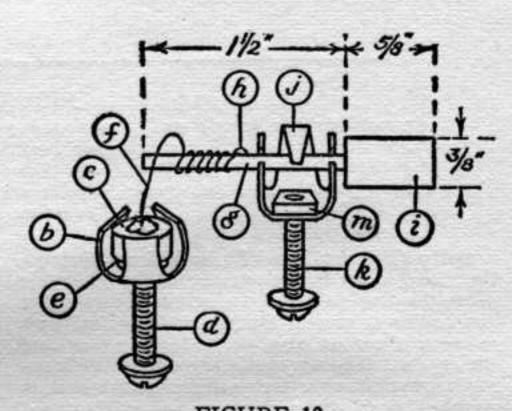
The complete detector assembly, showing the general arrangement of all the parts used.
